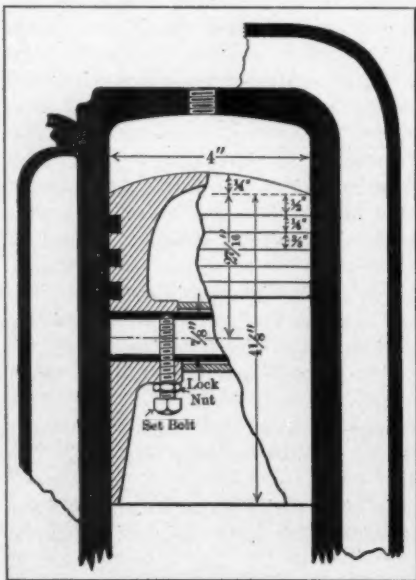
Showing a section through a piston for a motor of 4 inches bore
